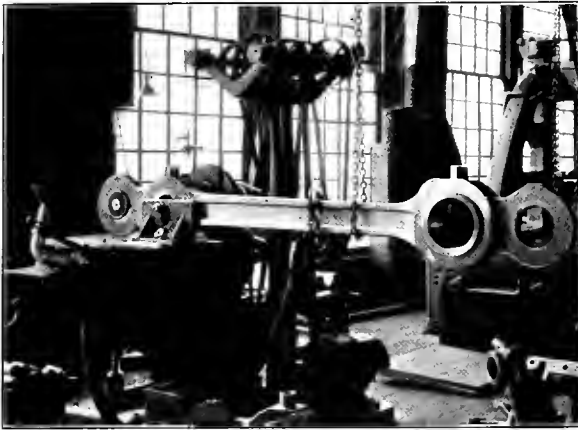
Grinding Knuckle Pin Bushings in Side Rods
